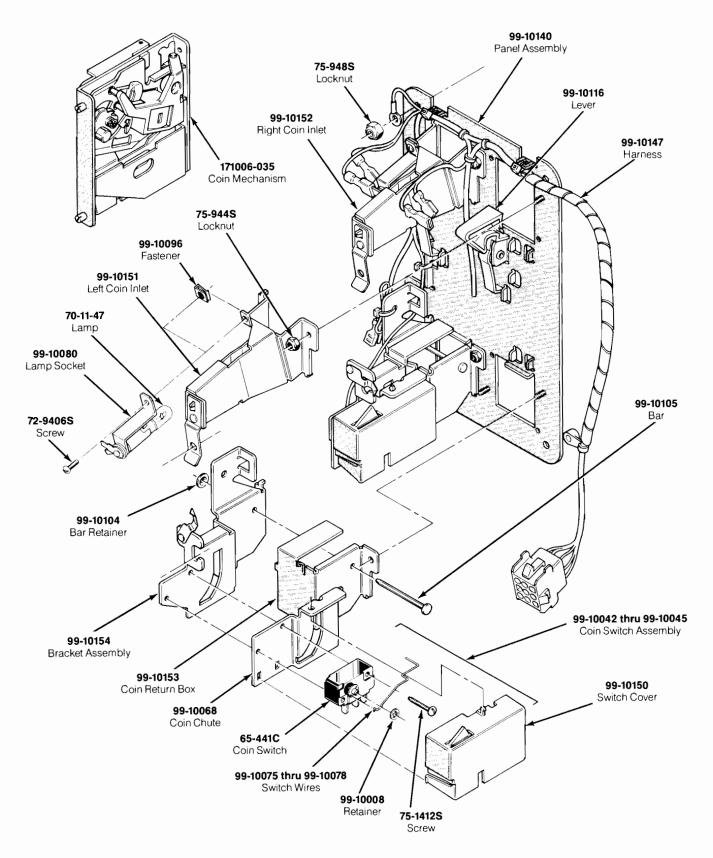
Coin Acceptors, Inc. Coin Door Assembly 171027-001 A
